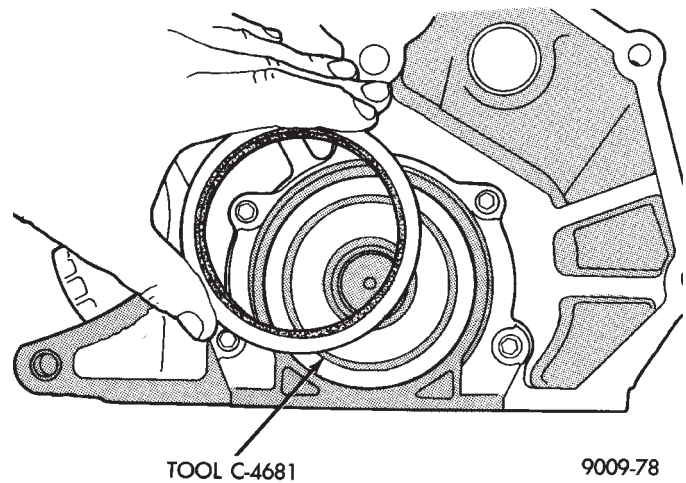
Removing Rear Crankshaft Oil Seal
